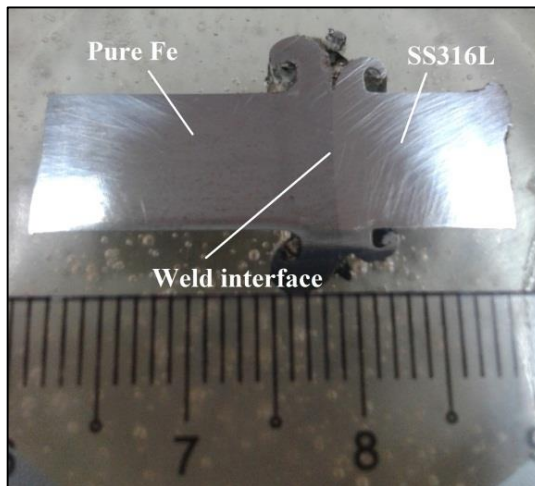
Dissimilar metals were joined through the friction welding
